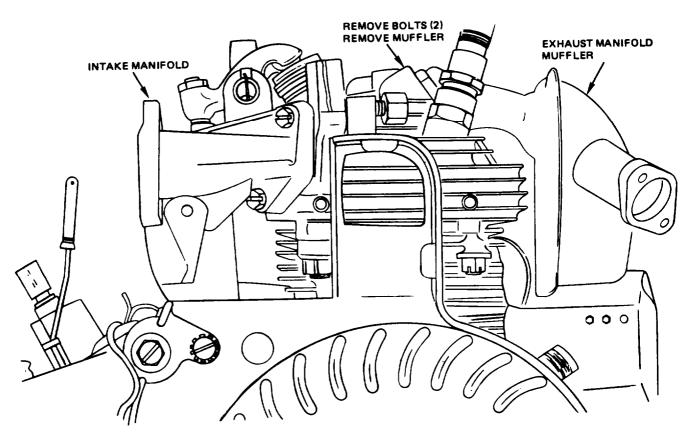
Exhaust Manifold-Muffer, Removal and Installation (Models 1A08-2 and 1A08-3)
